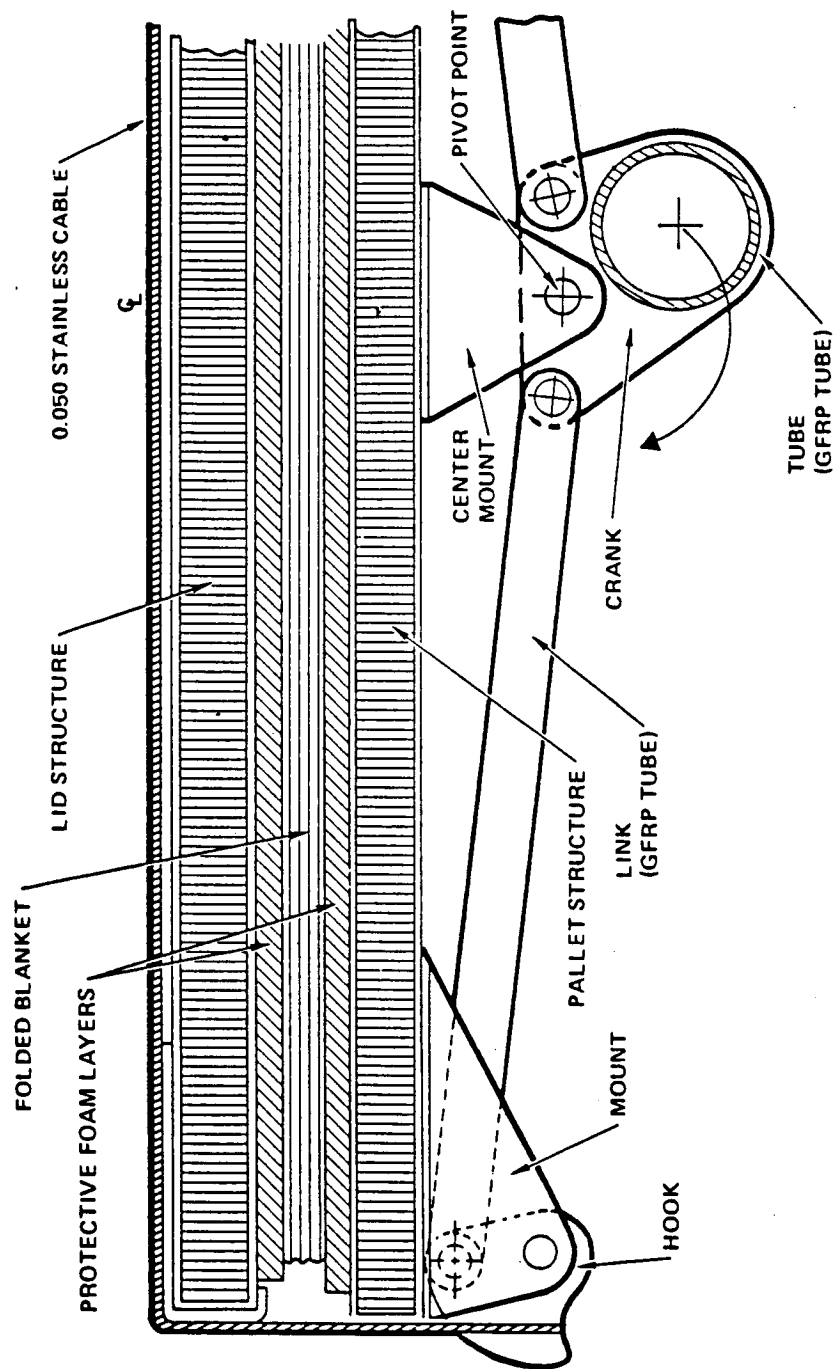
Torque Tube Stowed Blanket Preload Mechanism Concept
